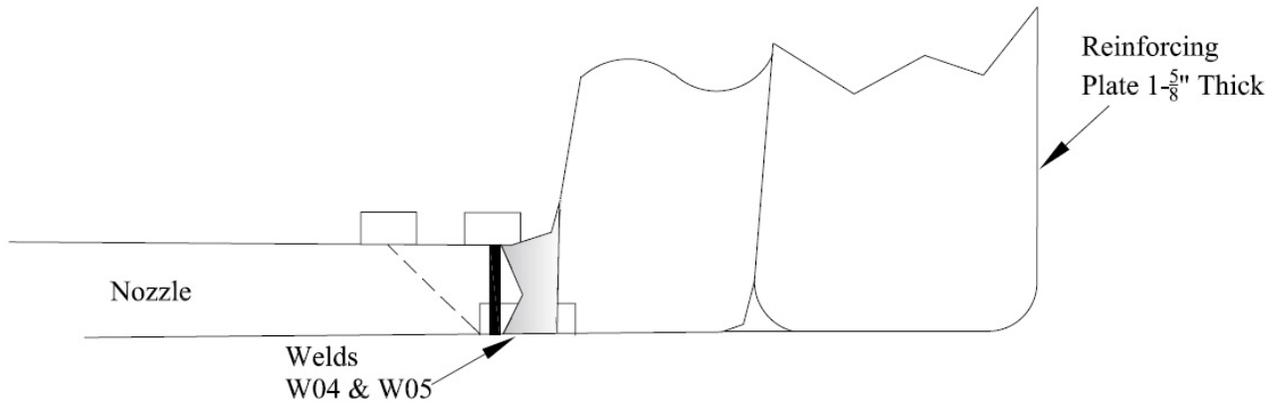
for RHR Heat Exchanger Nozzle Welds
